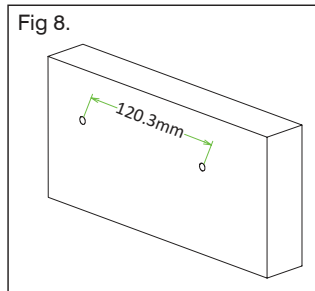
Drill 2 holes (ø6mm, depth 50mm) - 120.3mm spacing
